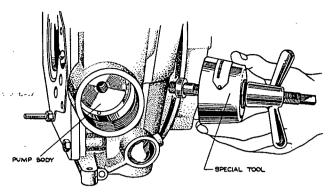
Extracting the pump body from the casing using special tool Churchill L183
